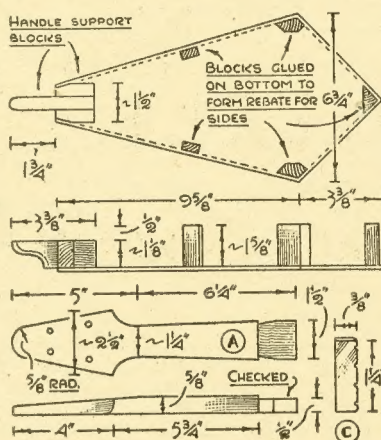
Bottom with blocks in place handle shape and bone piece C
